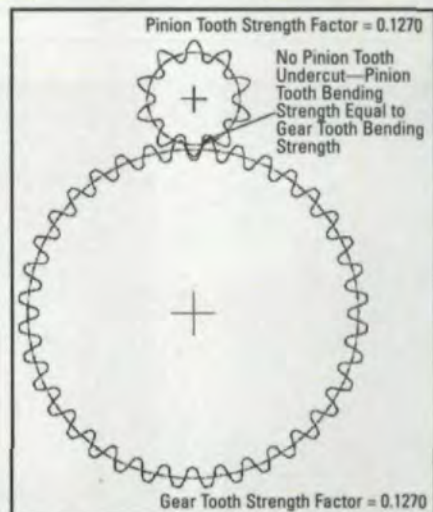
Long addendum 10-tooth pinion with standard addendum 36-tooth gear.
